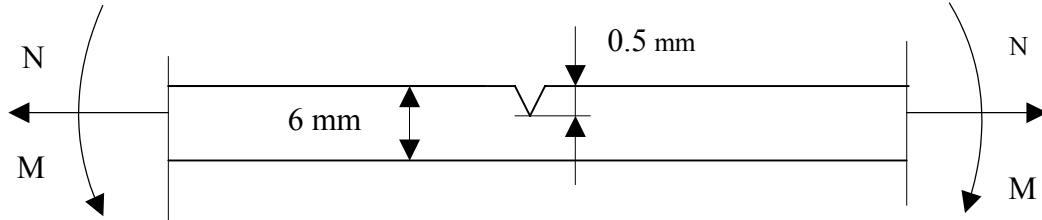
Calculation model for a sample with a like crack defect in a sheet or butt weld
